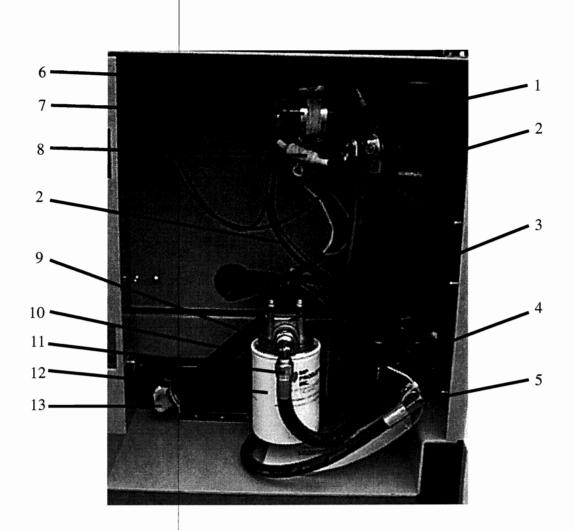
L.P. Assembly Dual Fuel Engine
